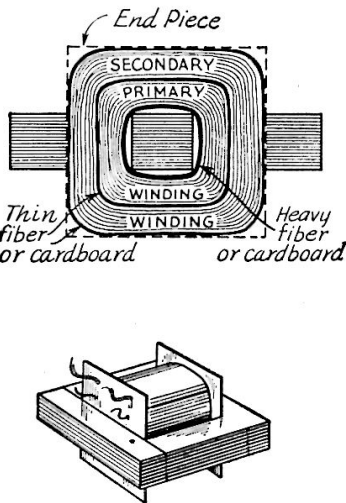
A convenient method of assembling the windings of a shell-type core. Windings can be similarly mounted on core-type cores, in which case the coils are placed on one of the sides. High-voltage core-type transformers sometimes are made with the primary on one core leg and the secondary on the opposite.
